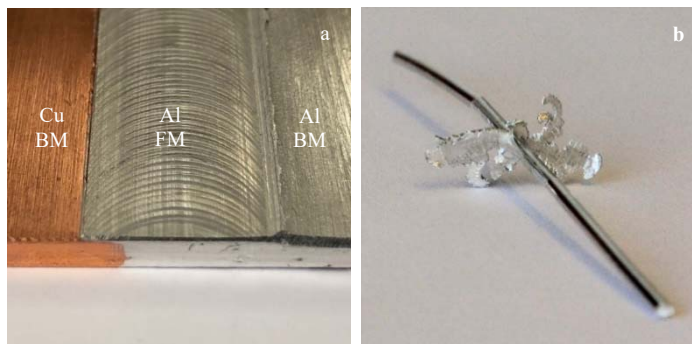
Metallic joints fabricated by means solid-state welding techniques that are considered as macroscale reference in this work: (a) Copper-aluminium joint obtained by Hybrid metal extrusion & Bonding (HYB); (b) Aluminium-aluminium Cold Pressure Welded (CPW) joint with its flash.
